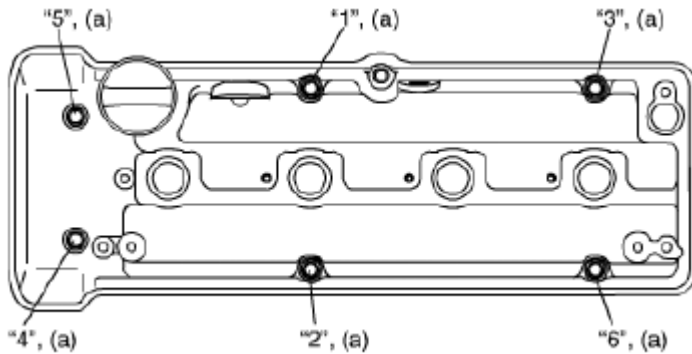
Identifying Tightening Sequence Of Cylinder Head Cover Nuts
